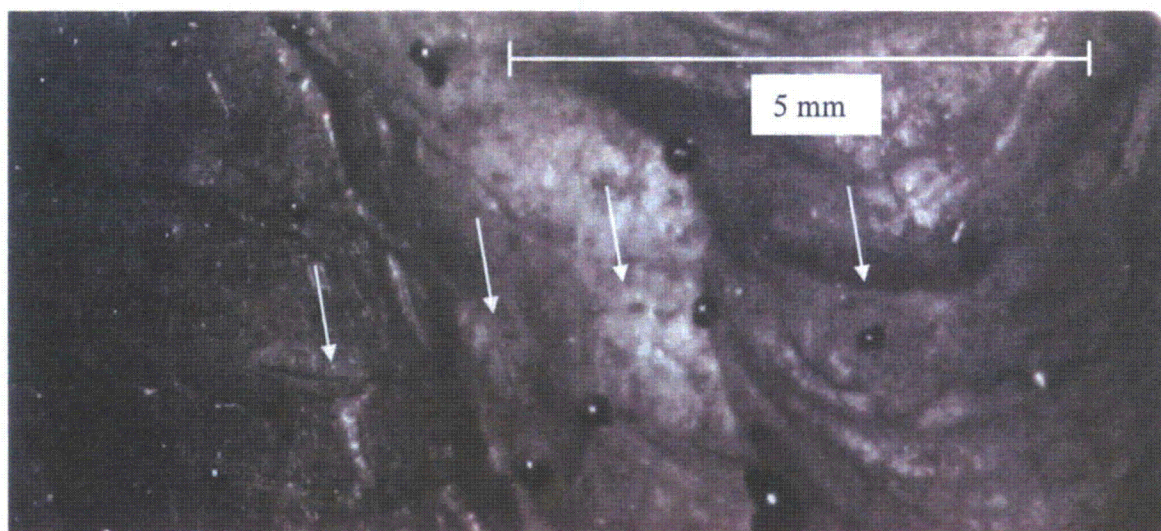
Crack-Like Indication in the J-Groove Weld Replica, of Nozzle 59 at 225 Degrees
